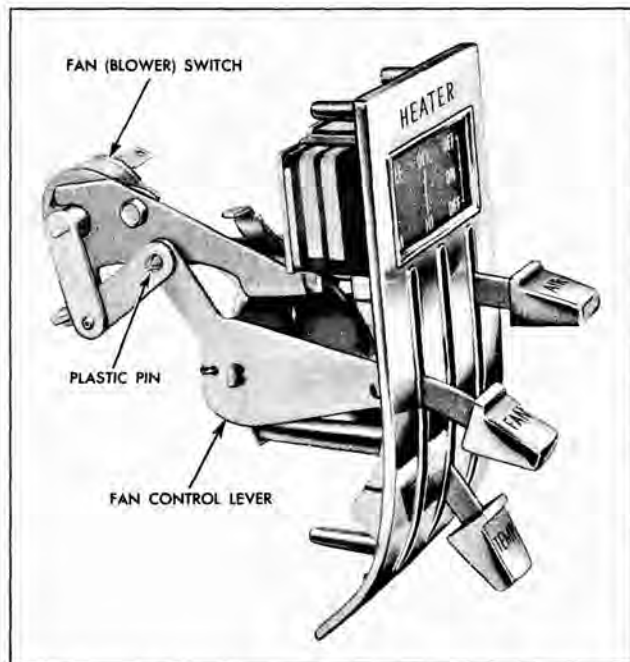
Tempest Control Panel Fan (Blower) Linkage
